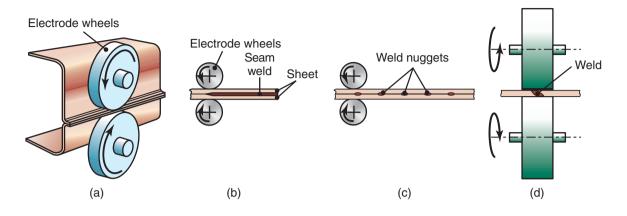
(a) Seam-welding process in which rotating rolls act as electrodes. (b) Overlapping spots in a seam weld. (c) Roll spot welds and (d) Mash seam welding.
